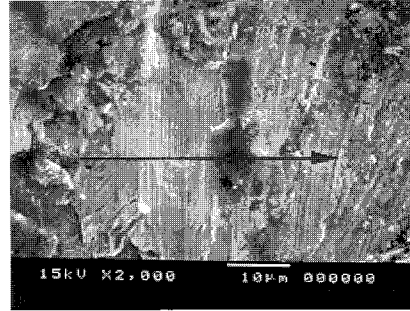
The Valve spindle of No. 1 main engine intake valve(1-IN-02)
